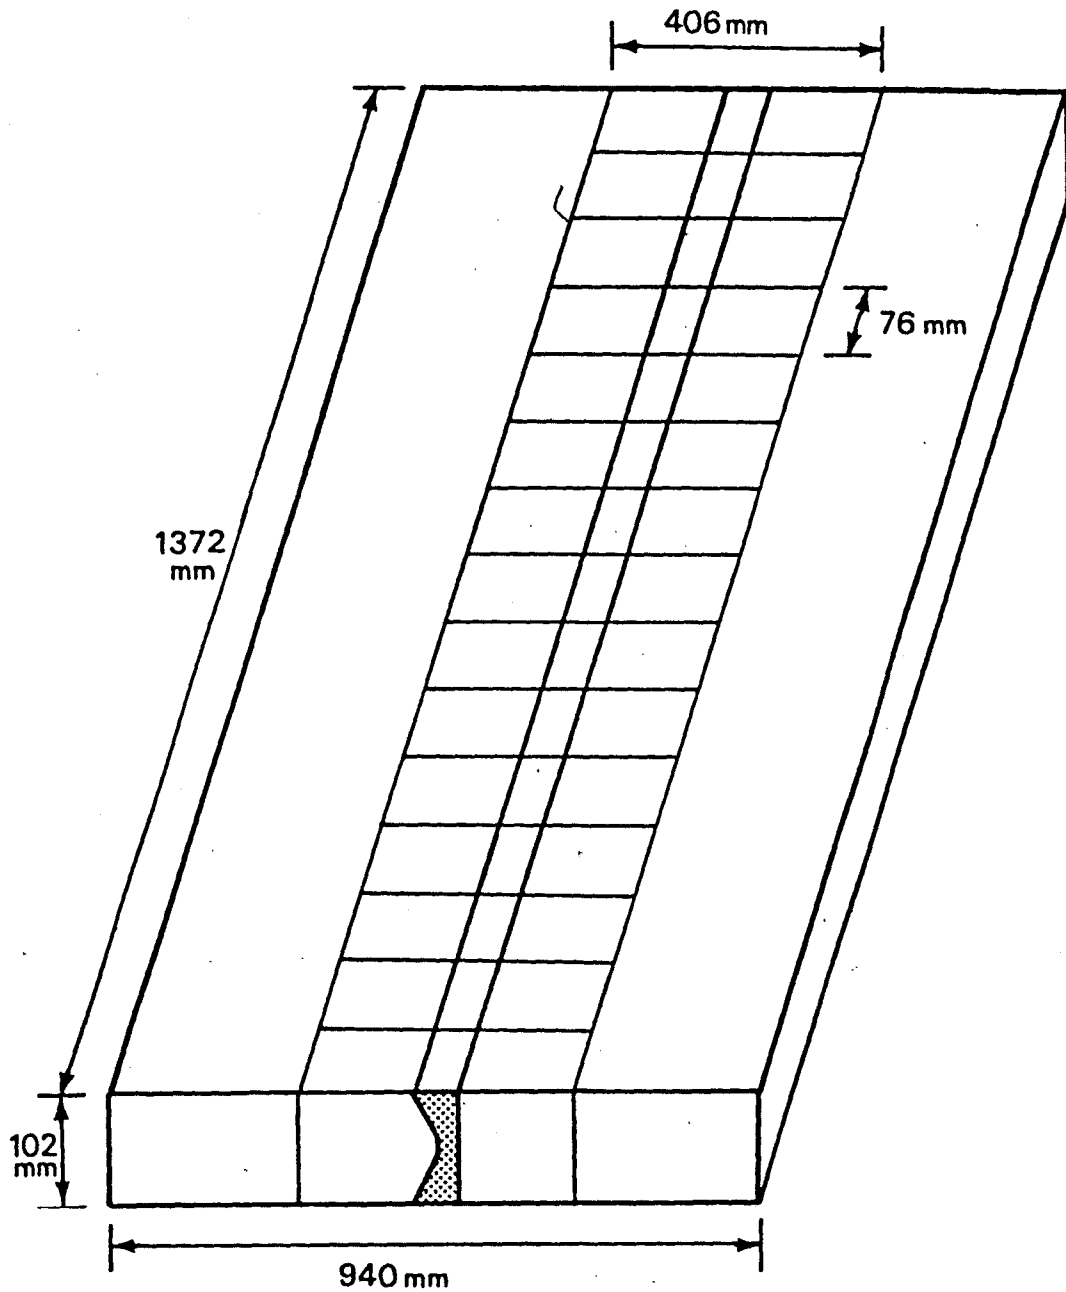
SECTIONING DIAGRAM OF WELDED PLATE
